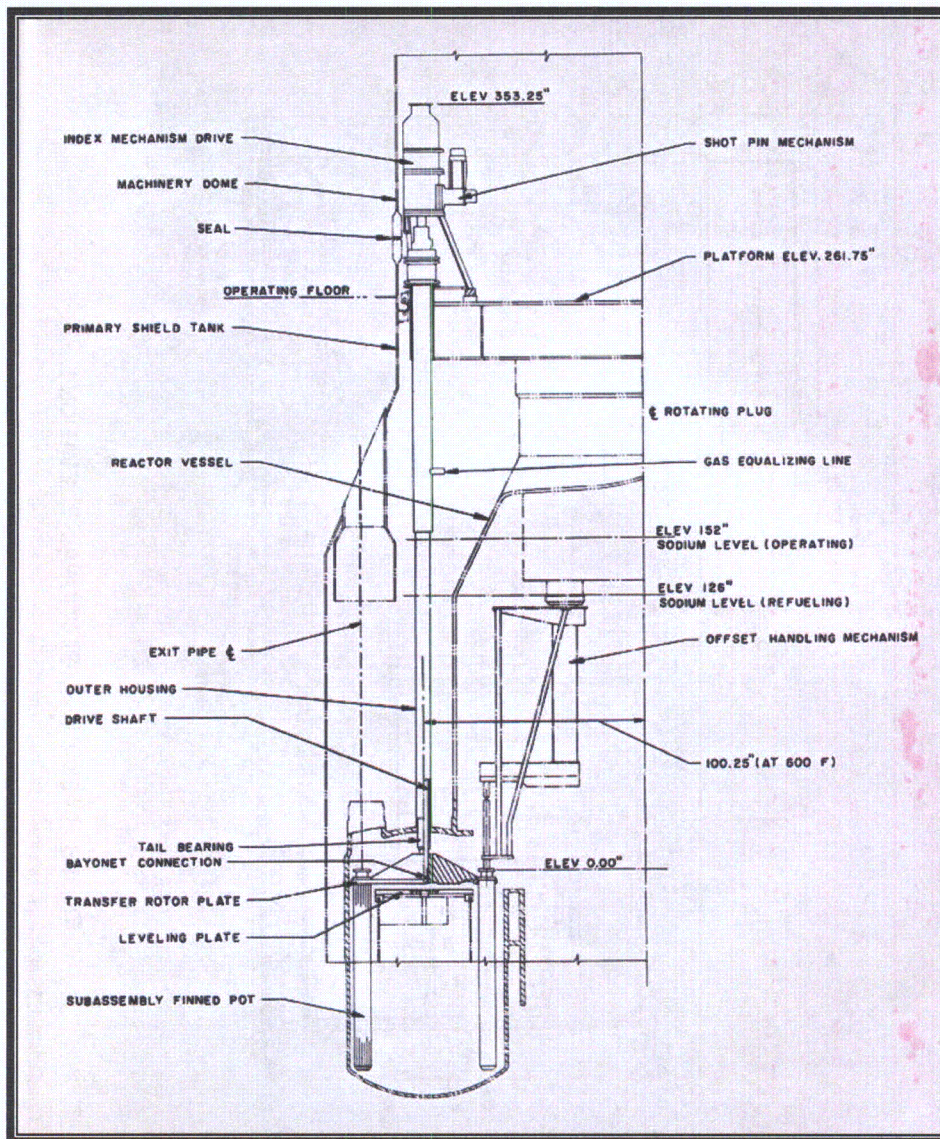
Section of subassembly rotor and exit pipe (Courtesy DECo)
